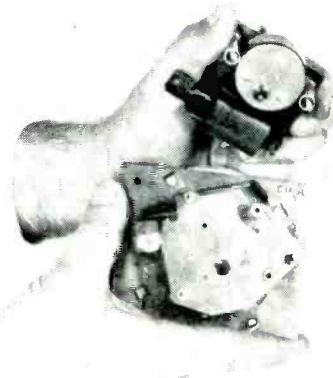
The old rotor and field and coil assembly lifts out in one piece.
